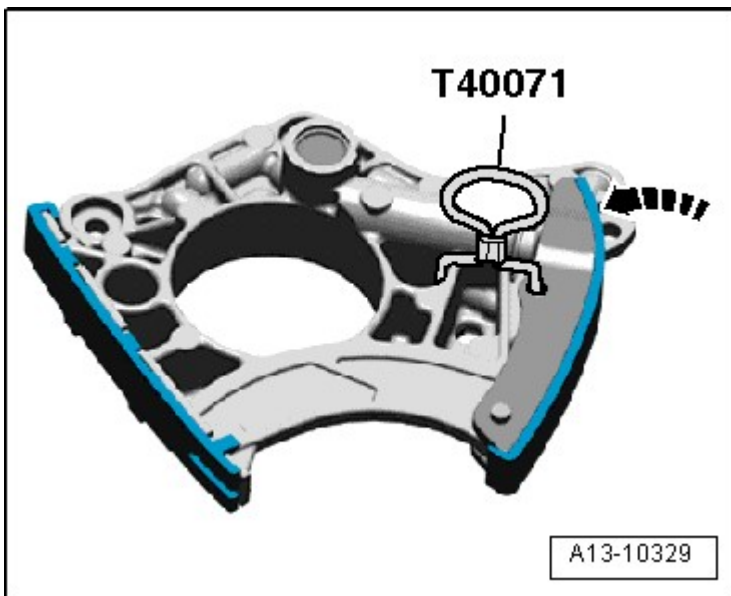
Pressing Left/Right Camshaft Timing Chain Guide Rail Inward And Securing Chain Tensioner With Locking Pin T40071
